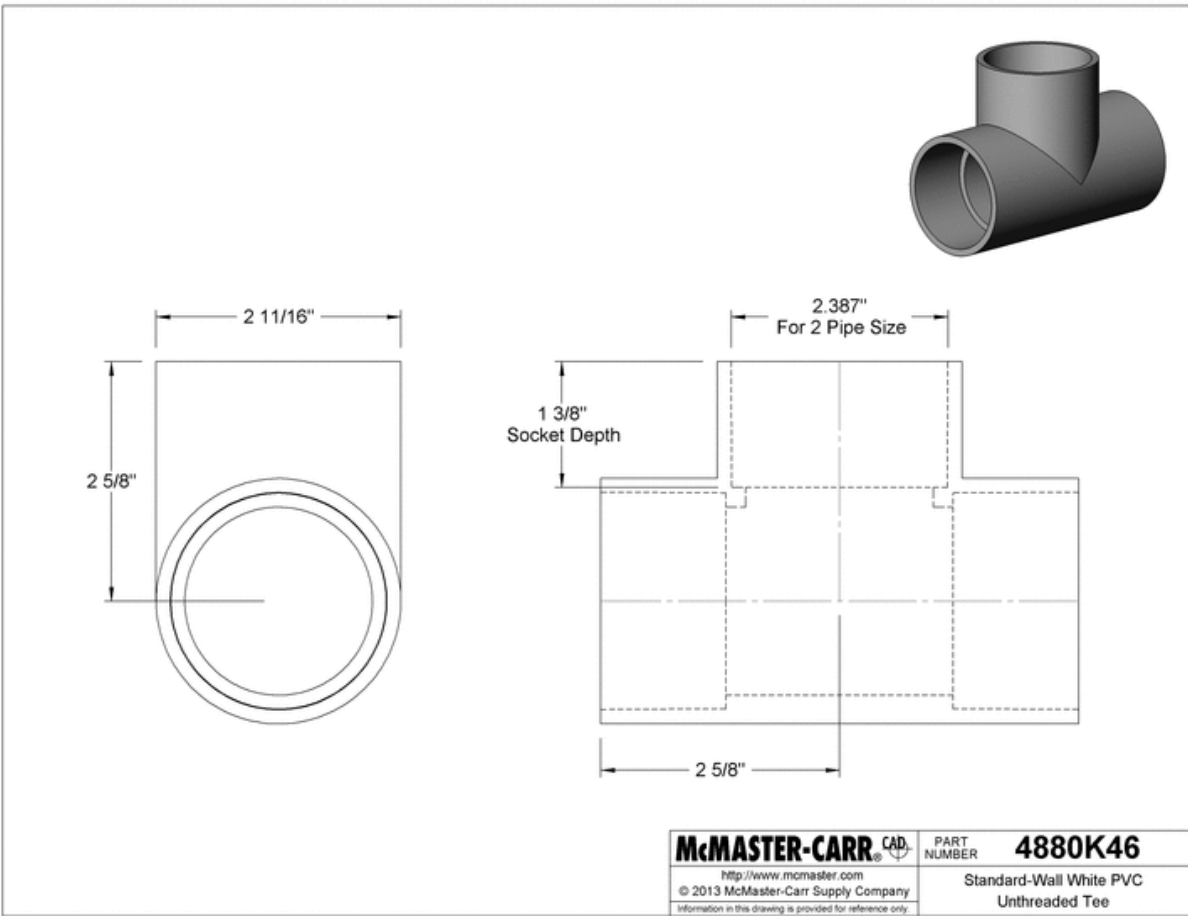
Two Inch PVC Tee Connector Engineering Drawing [28]
